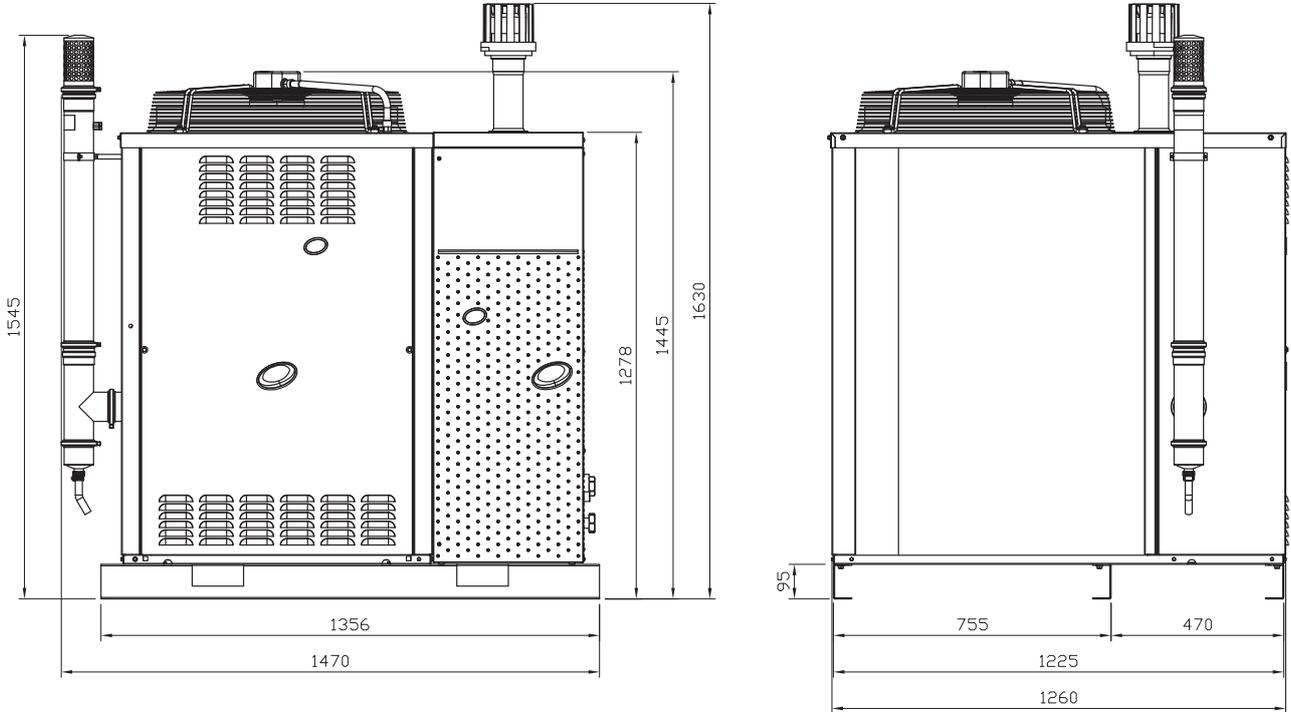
Dimensions (Silenced ventilation) - Front and side view (dimensions in mm)
